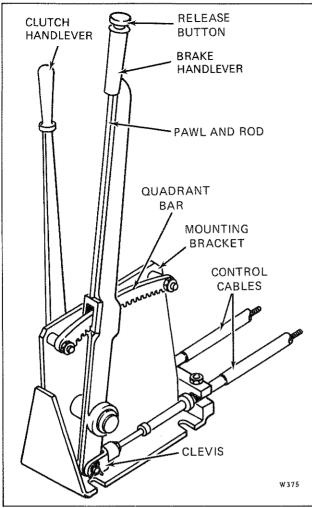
CONTROL ASSEMBLY, DIRECT DRIVE WINCH
